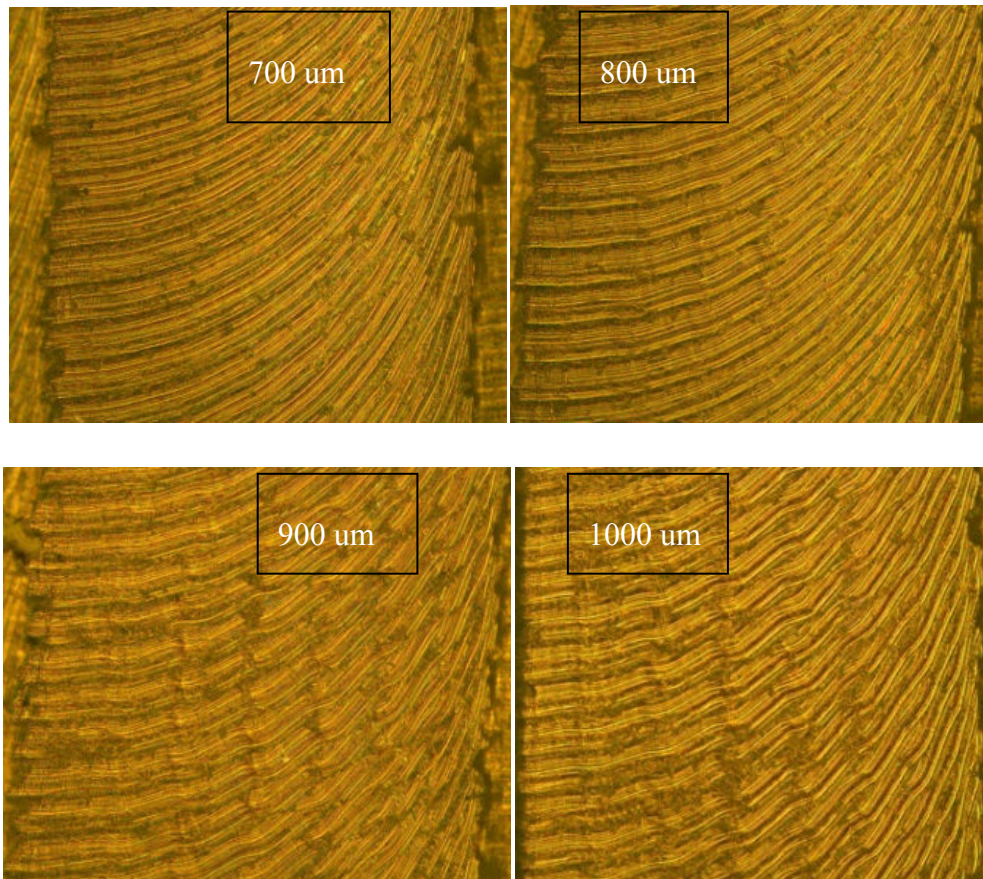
Microscopy photos of machined bottom surfaces during the tests. (Radial depths of cut are 1 mm. The pictures show bottom surfaces of 1mm wide steps.)
